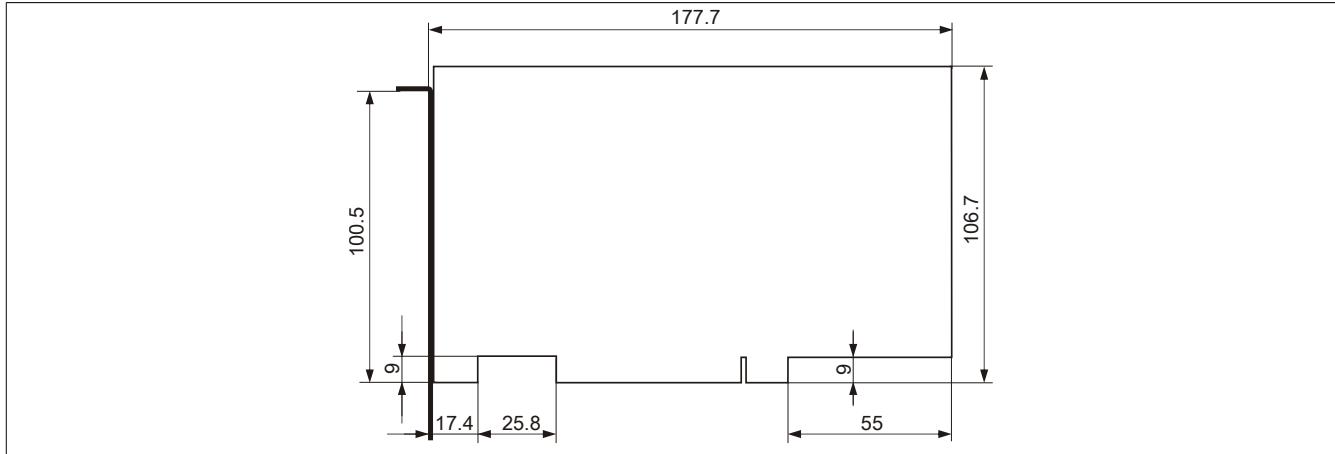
Dimensions - Standard half-size 32-bit PCI card
